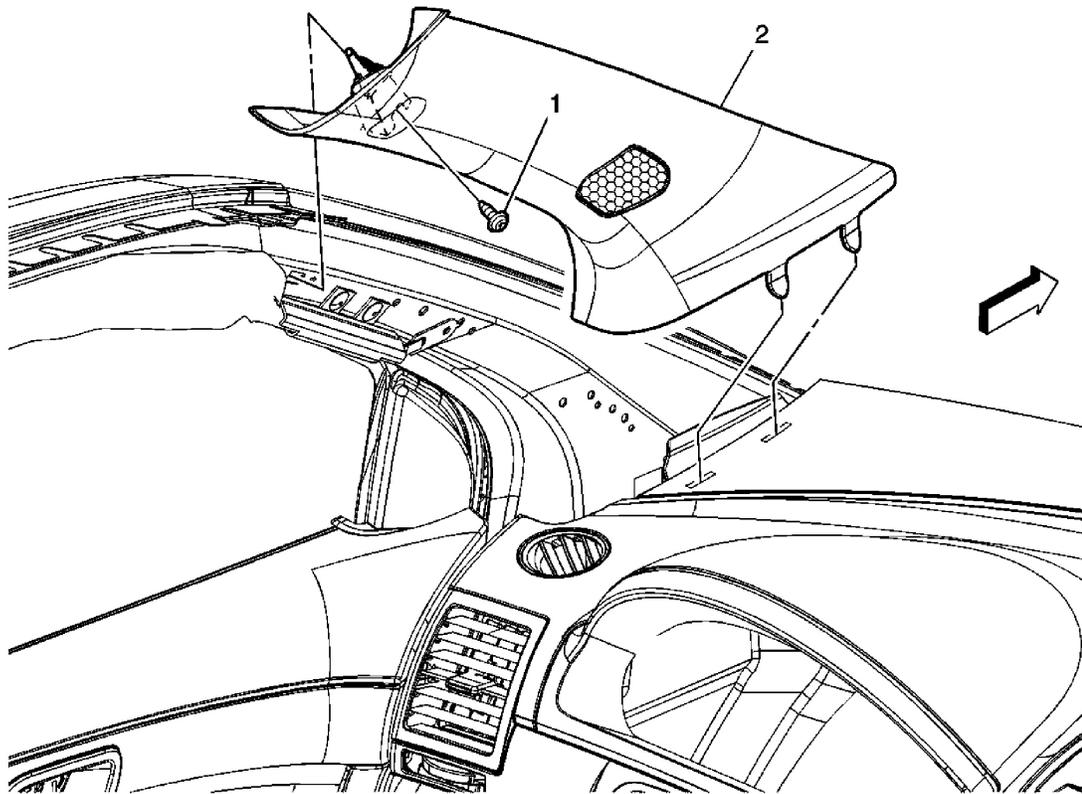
Identifying Windshield Garnish Molding - Left Side
